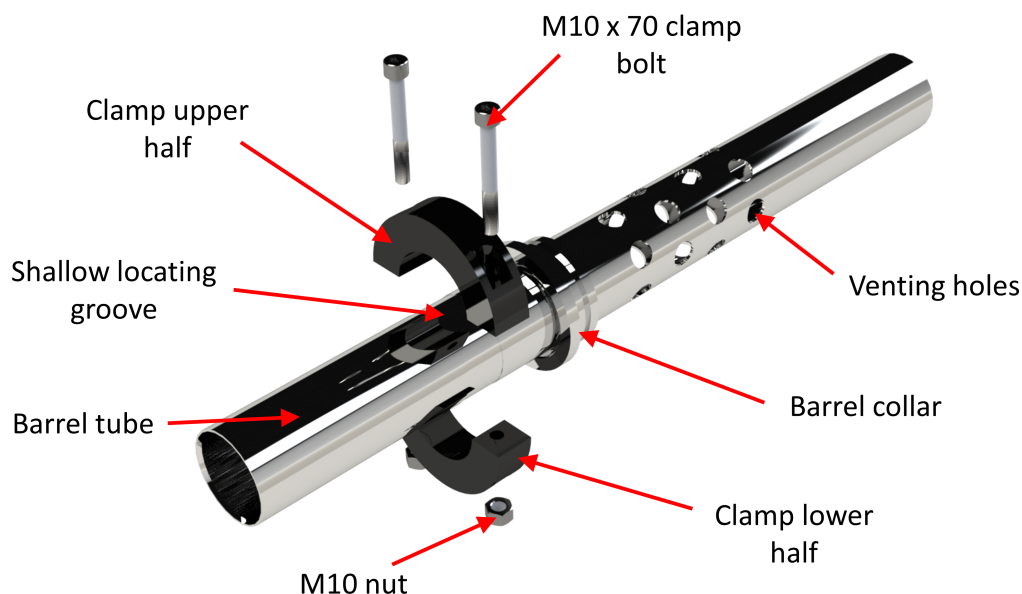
Isometric exploded view of the barrel assembly, with clamped collar
